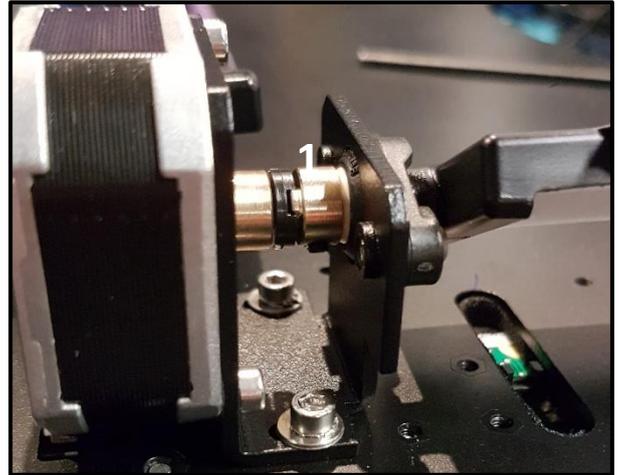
ADJUSTMENT OF THE MOTOR-MIRROR COUPLING
